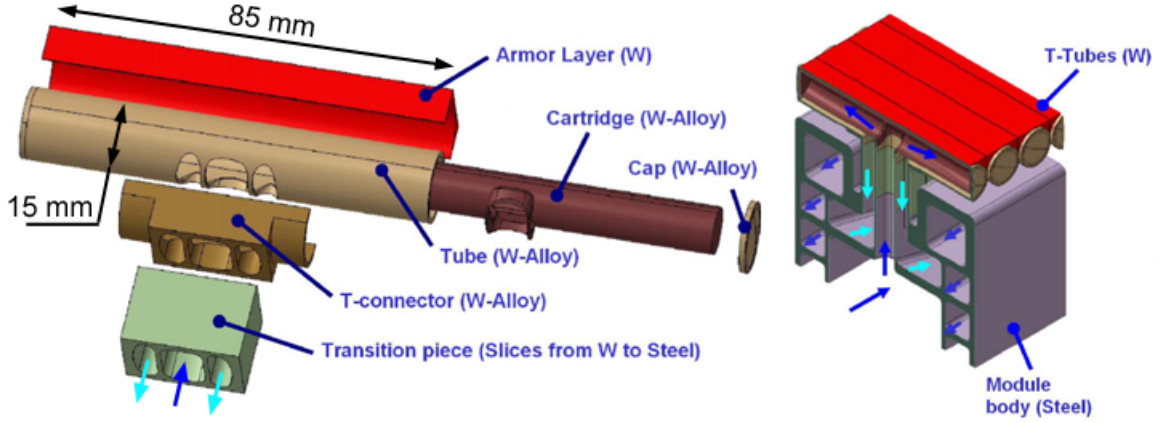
T-tube divertor module geometry (Ihli et al., 2005). The basic T-tube is shown on the left: the coolant will enter at the center location and exit at the two symmetrical outlets on the sides. The basic modules will then be connected side by side to form a target plate.
